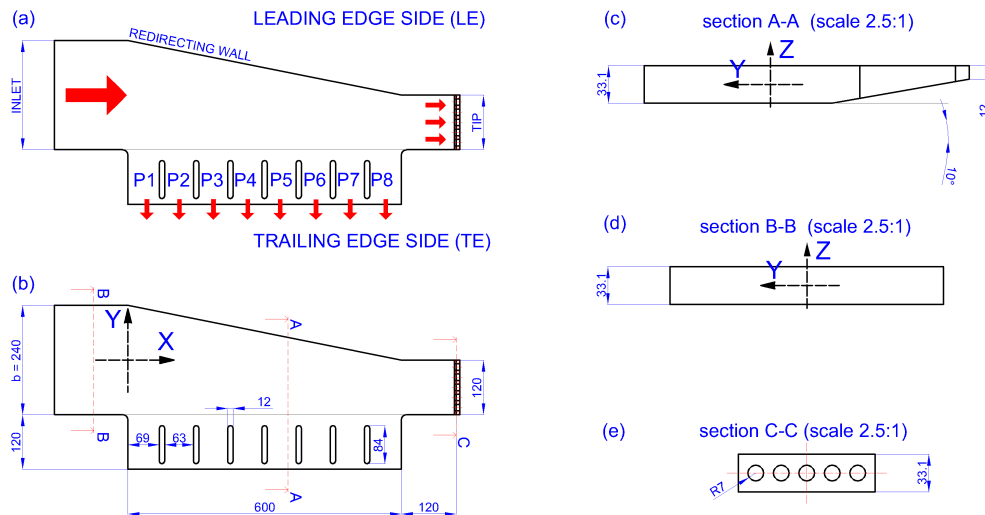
(A), (B) Schematic of the test section (configuration G0), (C) channel cross section, (D), Inlet cross section, (E) Tip cross section.
